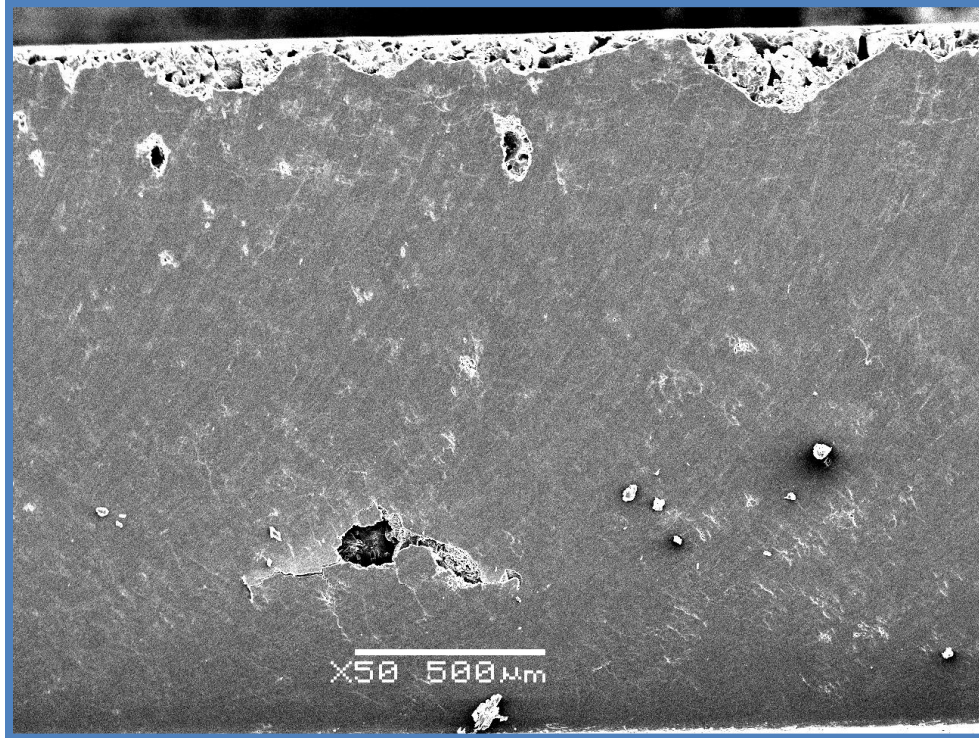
12000rev/min, 50mm/min up-milling CPP surface finish image, showing absolute loss of surface porosity and very bad chipping at the edge along the cut. The tool cuts are also visible on the surface.
